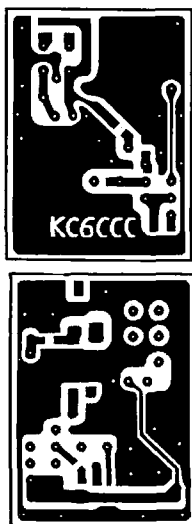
PC board foil patterns. (a). Bottom layer. (b). Top layer. Use a #74 size drill bit for all holes. Be sure to solder jumpers between the top and bottom layers where indicated for efficient grounding.
